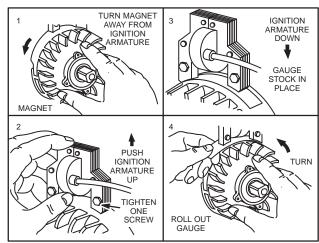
ADJUSTING IGNITION ARMATURE AIR GAP
